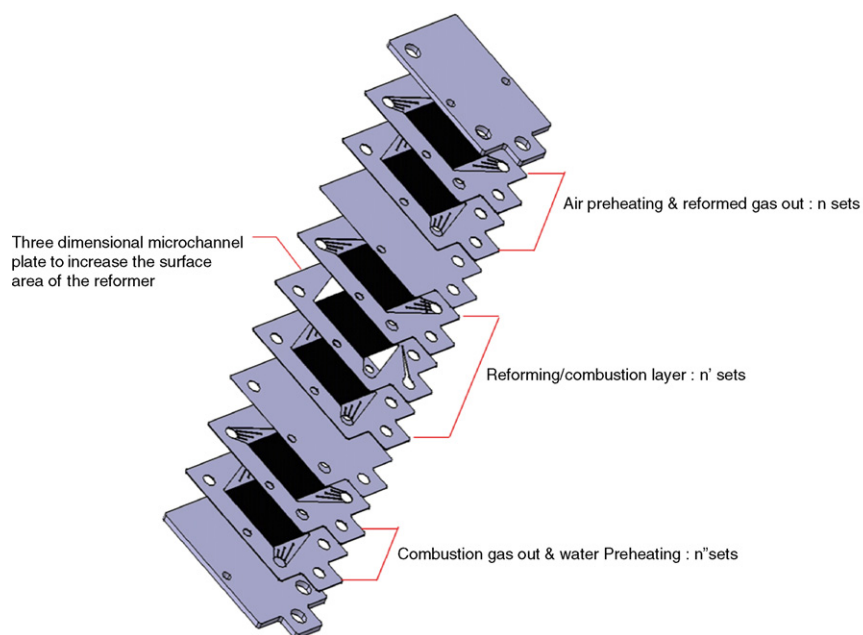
Schematic drawing of heat-exchanger integrated fuel processor. Three dimensional microchannel plates are installed between combustion plate and reforming plate to increase surface area of reforming plate.
